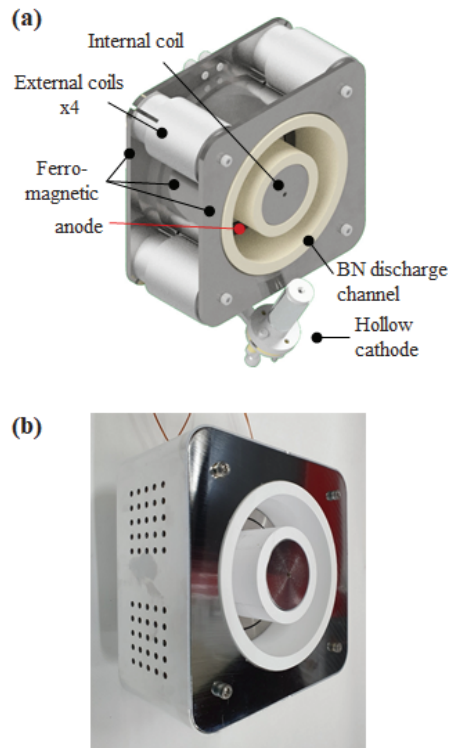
(a) 3D design, and (b) fabricated assembly of 30 mN class Hall thruster lab model.
